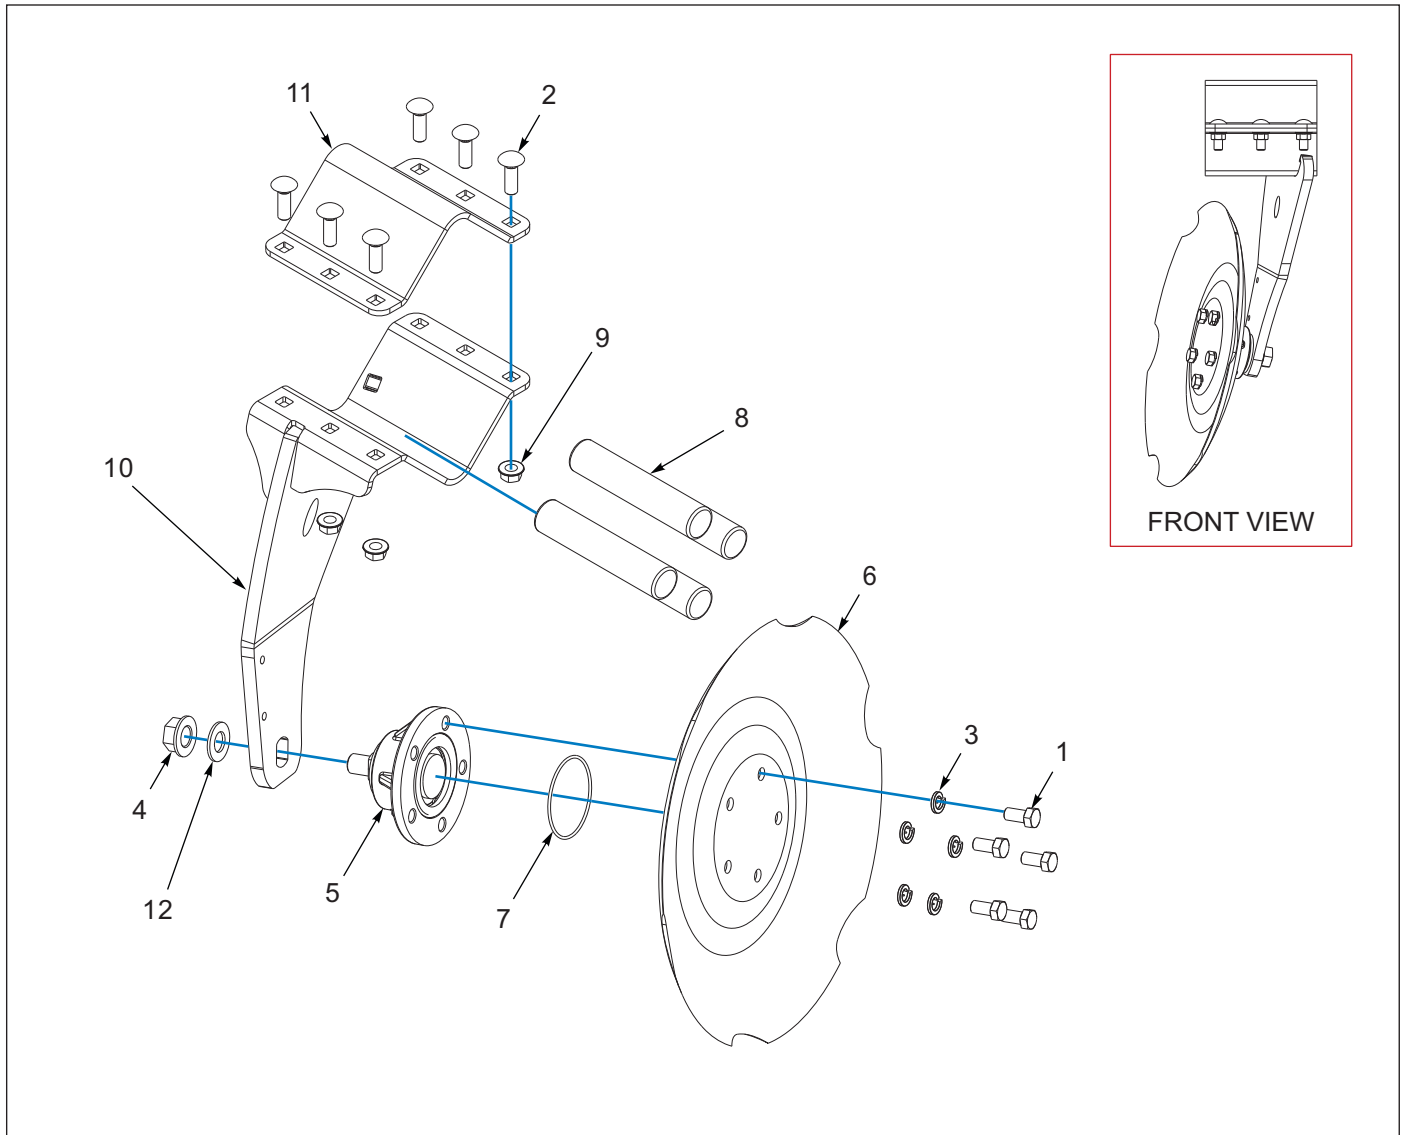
Hybrid Disc Assembly (RH), Notched
